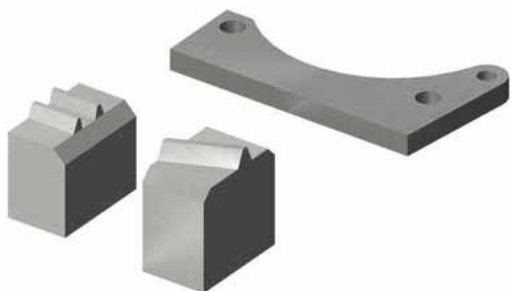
W936589003100 – Adaptor for HP Fuel Pump Holding Fixture
